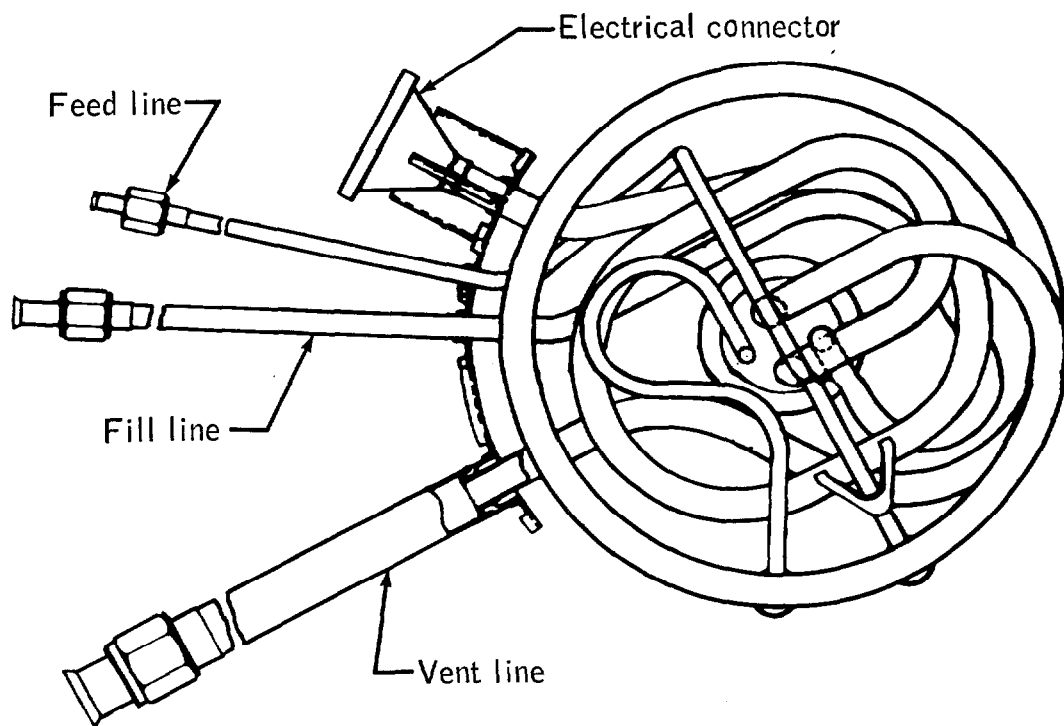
Arrangement of tubing within tank dome assembly.
